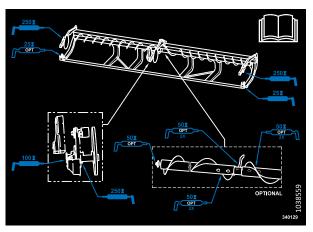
Decal for Double-Knife Header with Two-Piece Upper Cross Auger
